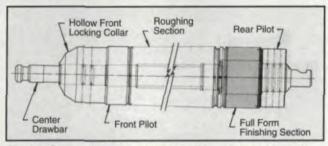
Construction details of a tensioned drawbar broaching tool.
